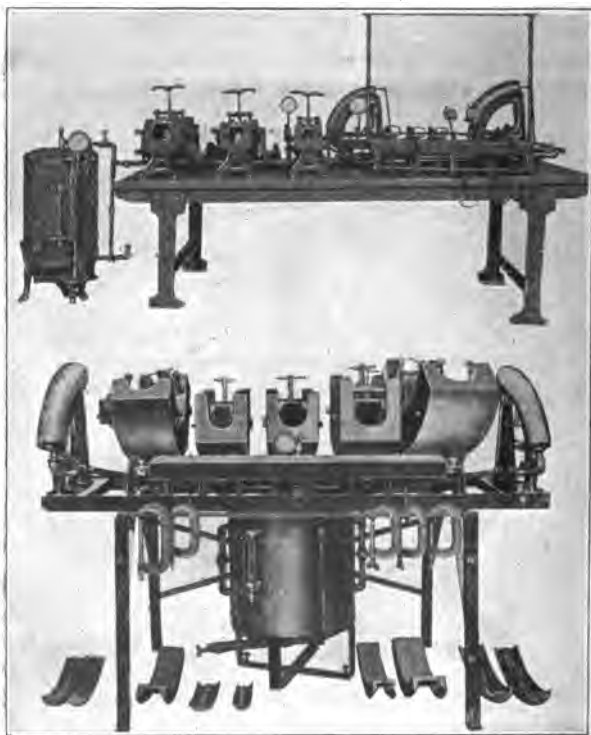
Cavities and unit to cure 2½" to 5" tires using shell, Akron Rubber Mould and Machine.
